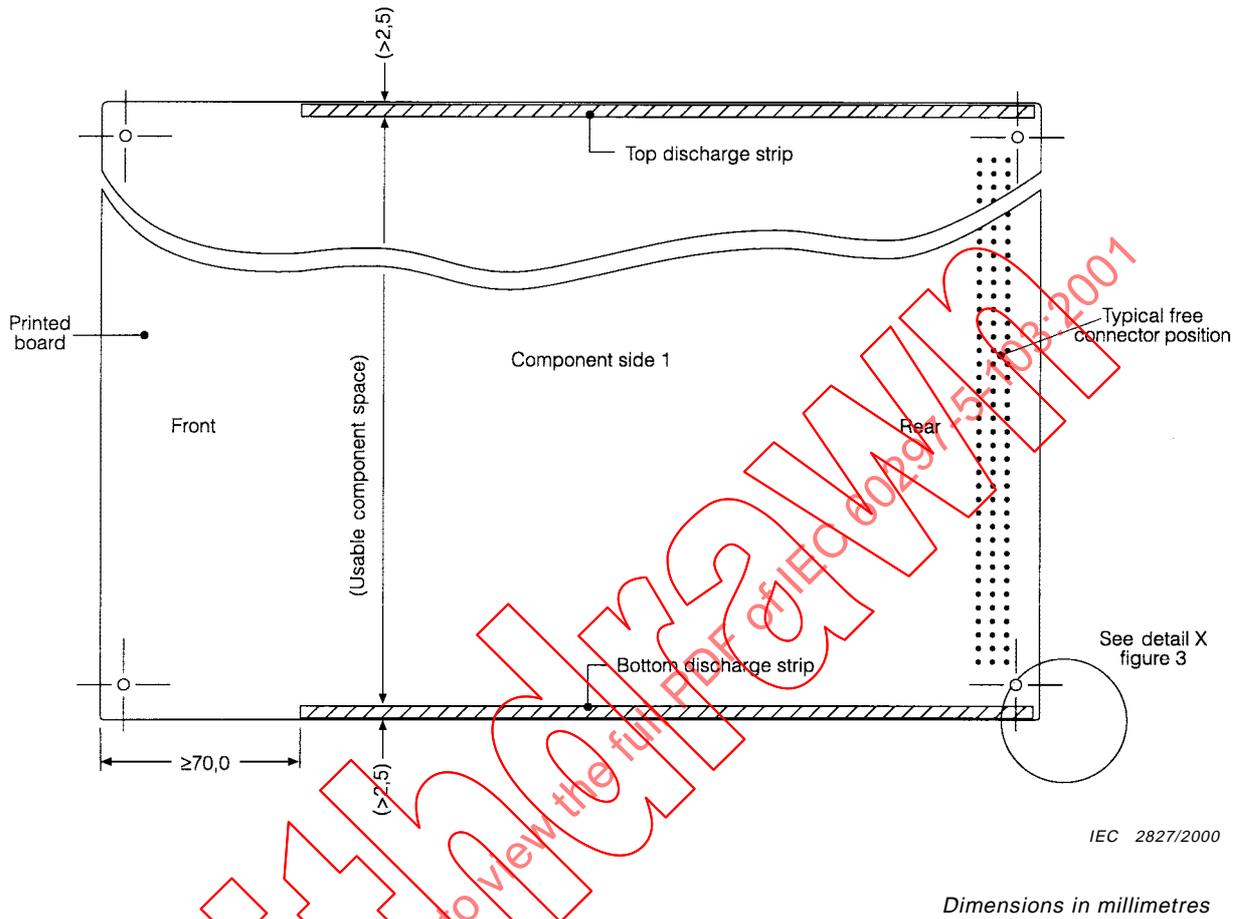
Printed board discharge strip dimensions breaking ESD contact before connector engagement
